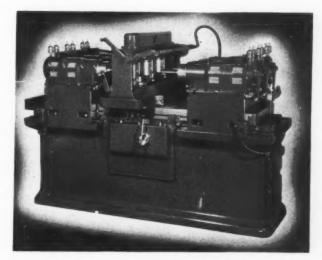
Close centers are permitted on boring machine employing shaftless motors
